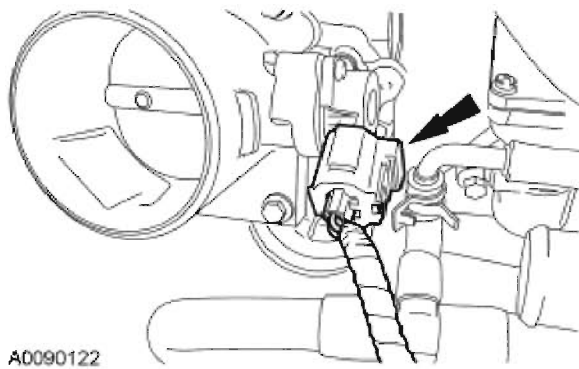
Locating Swirl Control Valve Electrical Connector
